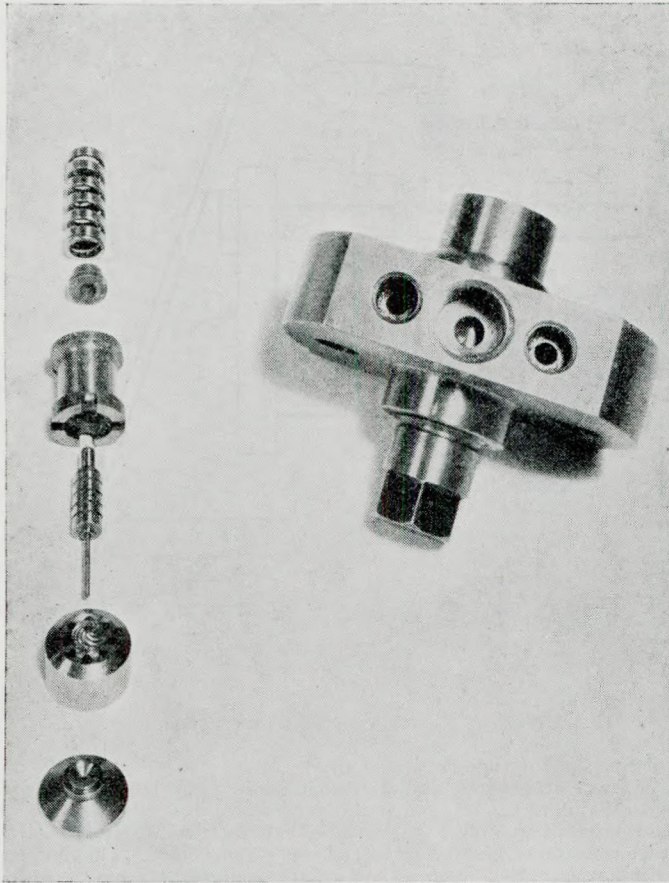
Ruston "O" type atomizer. On the left are spring, spring cap, valve guide, needle valve, cone (note spiral grooves), and nozzle; on the right is the complete unit.
